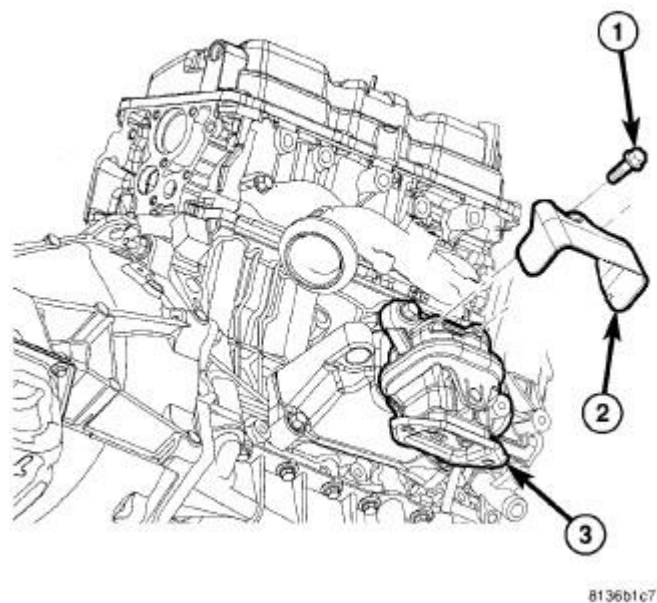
RIGHT ENGINE MOUNT HEAT SHIELD
